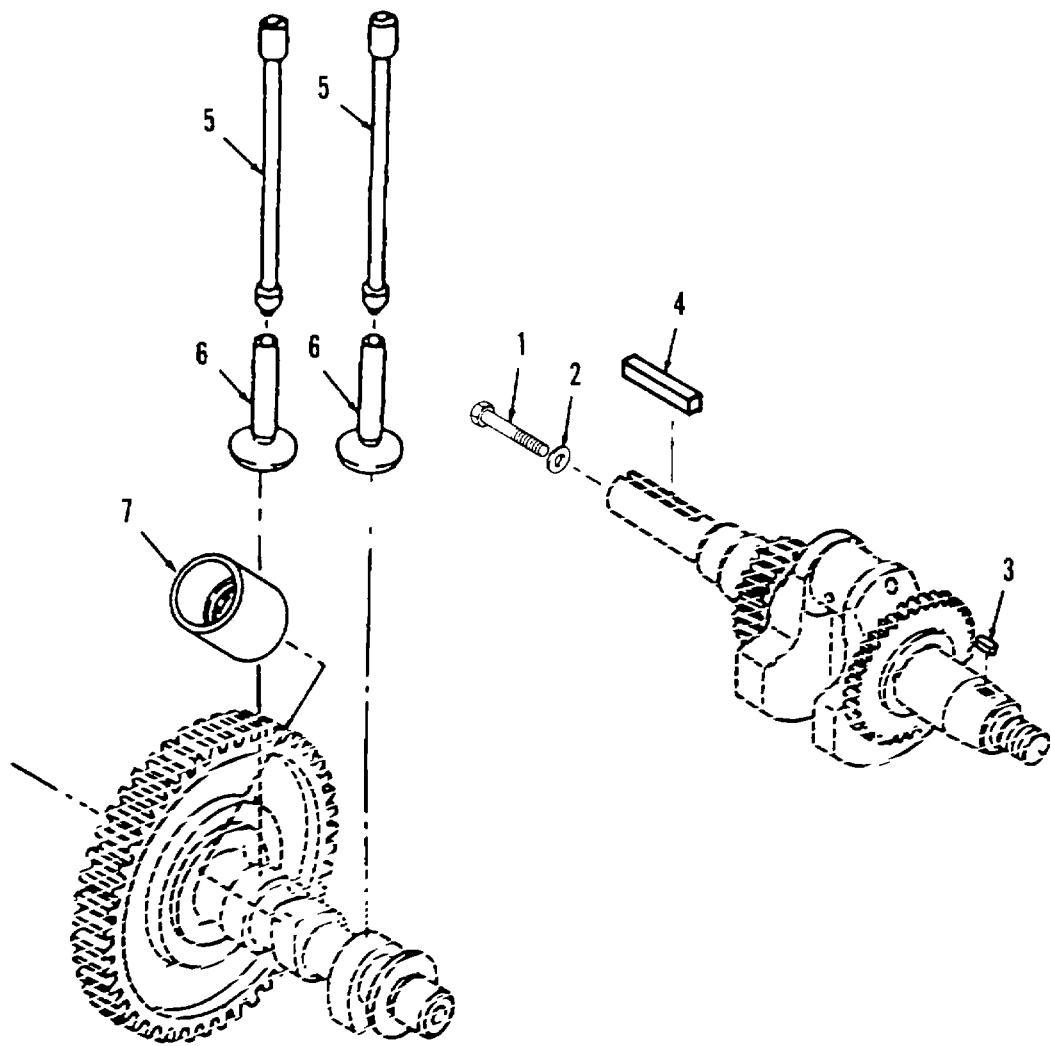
Balancer Shaft Assembly, Camshaft Assembly, and Crankshaft Assembly.
